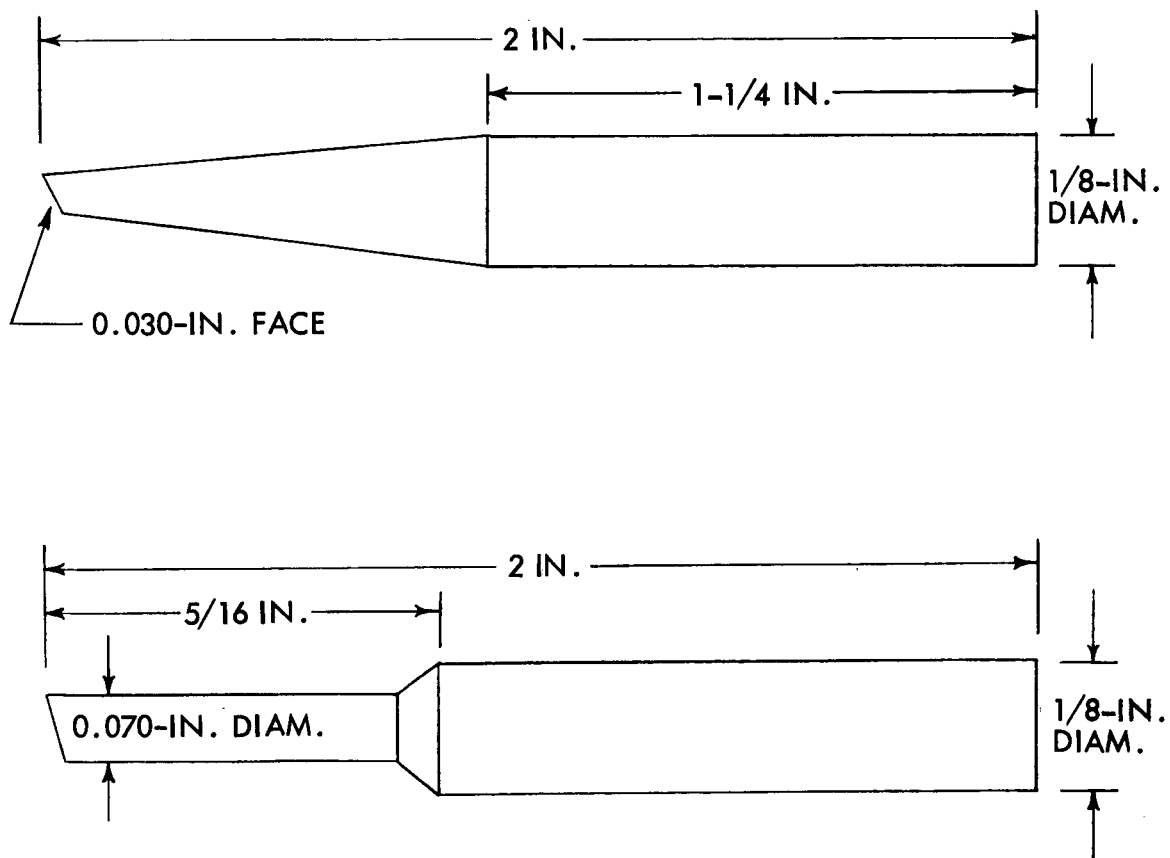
Electrodes Used With RAYTHEON Model OB and WELDMATIC Model 02-032-03 Welding Heads
